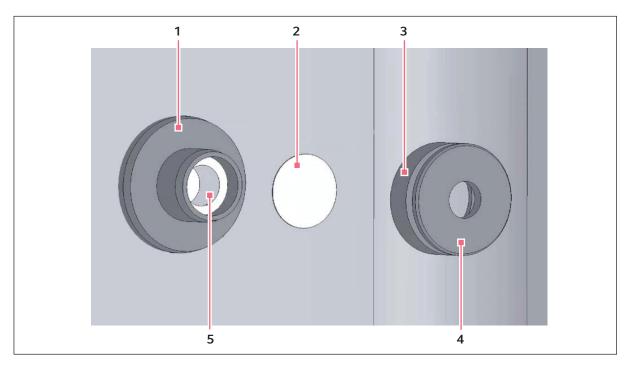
Hydrophobic filter and holder assembly (exploded view)
